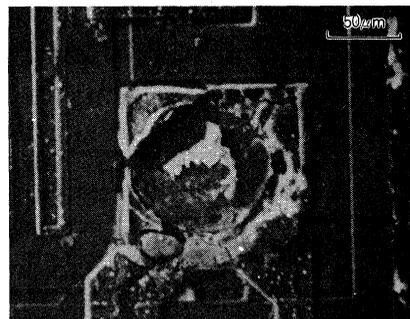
Enlarged micrograph of corroded Aluminum bonding pad
